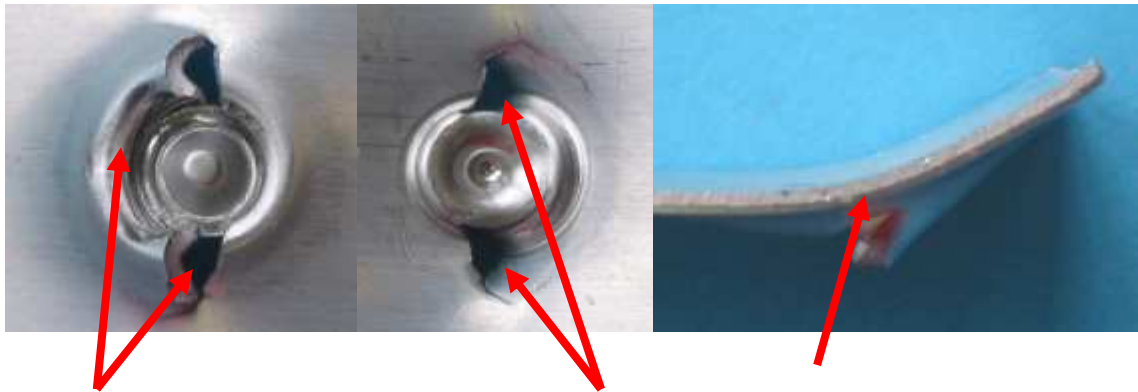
Aluminium 5182 on bottom (locked sheet) after the fatigue test
